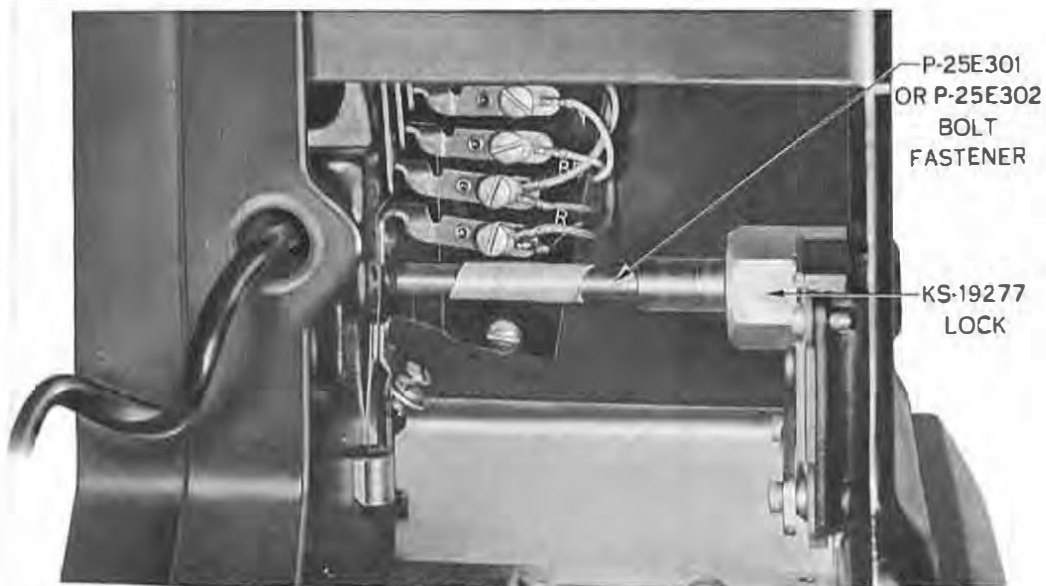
Cutaway Section of Upper Housing, KS-19277 Lock and Associated Parts, Completely Installed
